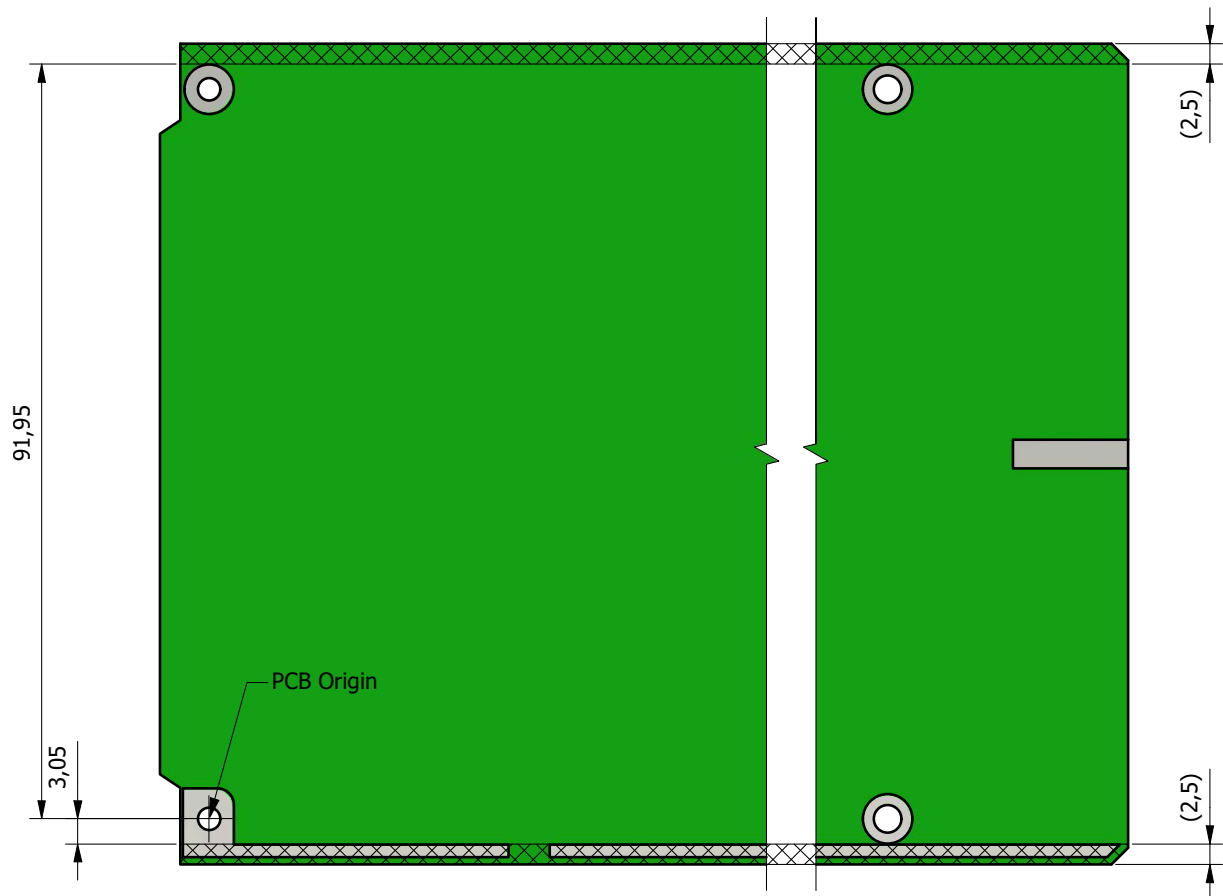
Keepout dimensions for guiderails on both sides of the PCB
